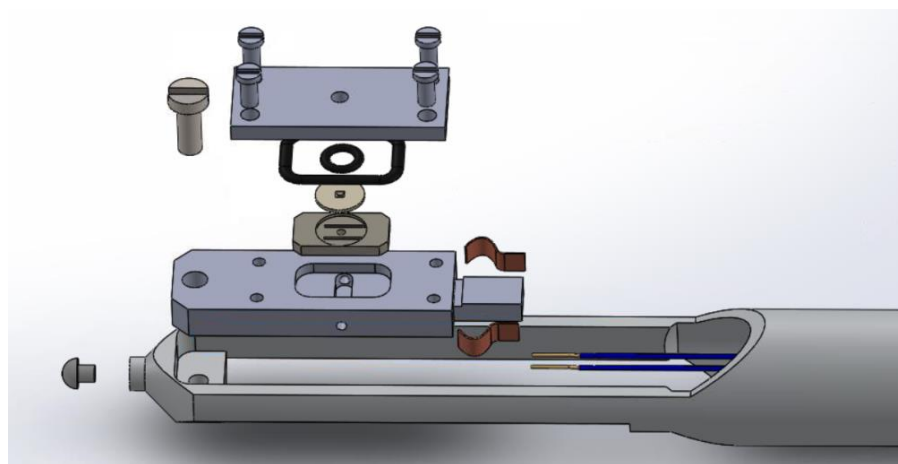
schematic illustration of exploded view of the electrochemical cell
